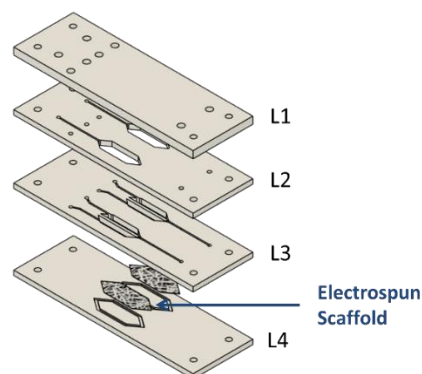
CAD design of the exploded view of the BoC into its four functional layers and the scaffold.
